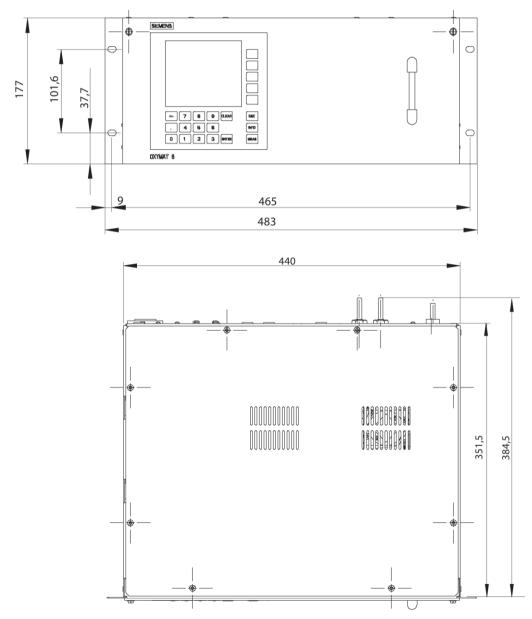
OXYMAT 6E, dimension drawing: Front view and top view
